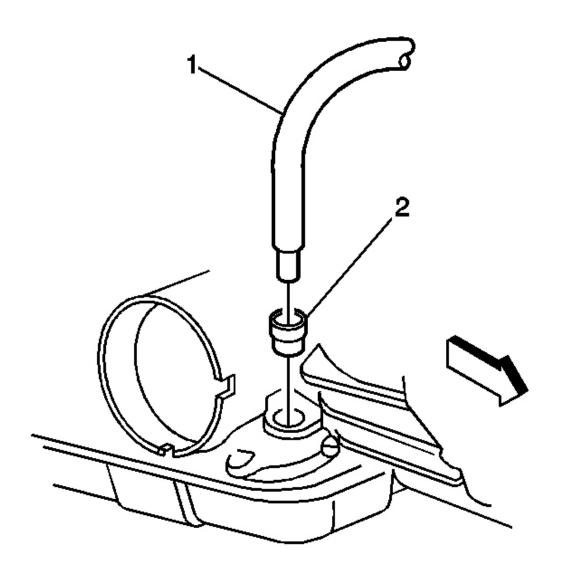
View Of Filler Tube & Seal Courtesy of GENERAL MOTORS CORP.
